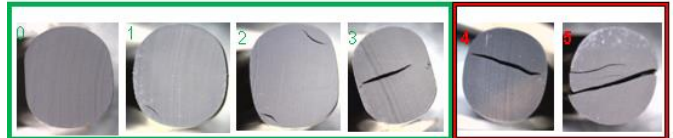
Norsok ED 0-5 Damage Rating (1-3 Pass & 4-5 Fail)^[3]
